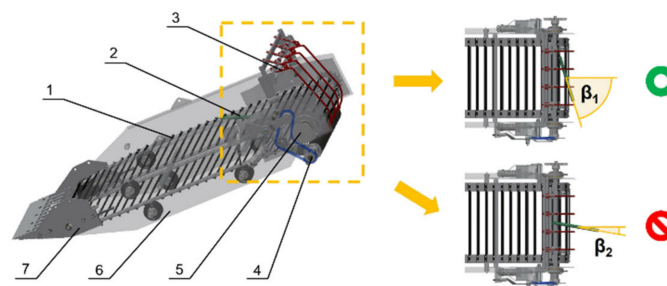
Schematic diagram of the structure and failure situation of the picking roller stem remover. 1. Separating rod sieve; 2. Potato stem; 3. Stem guide bar; 4. Grooved stem picking roller; 5. Separating rod sieve active shaft; 6. Rack; 7. Excavation shovel.
